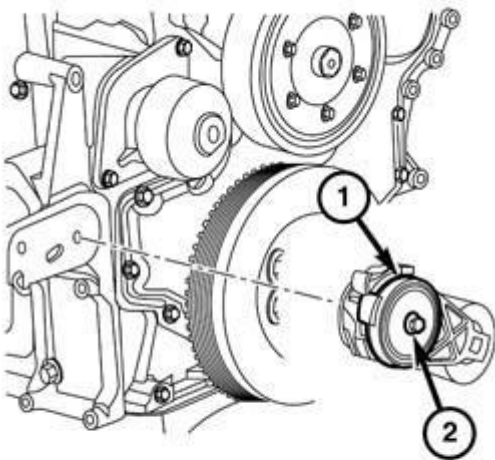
Accessory Drive Belt Tensioner & Bolt
